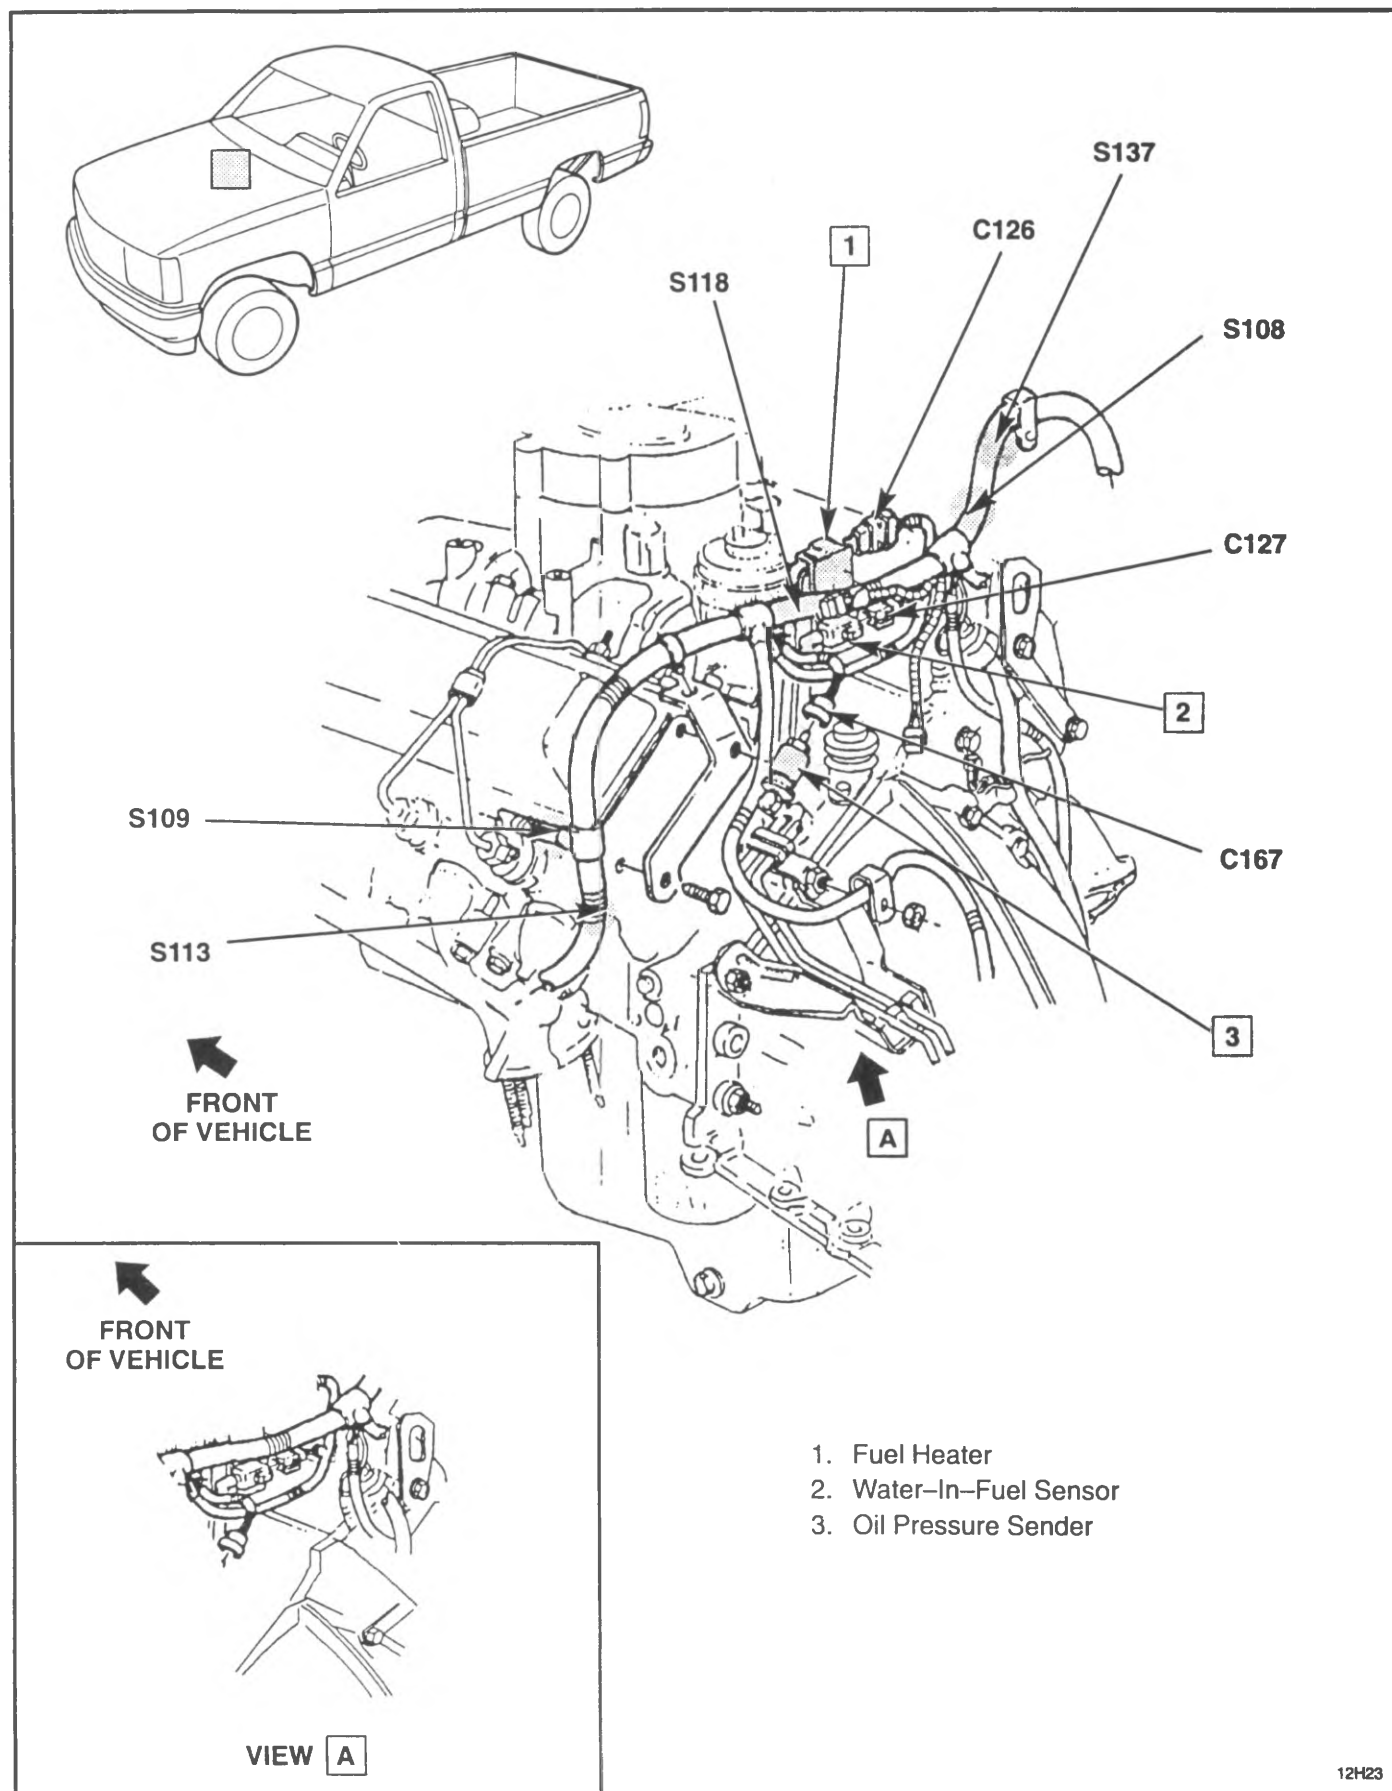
6.5L Diesel Engine Wiring, Rear
